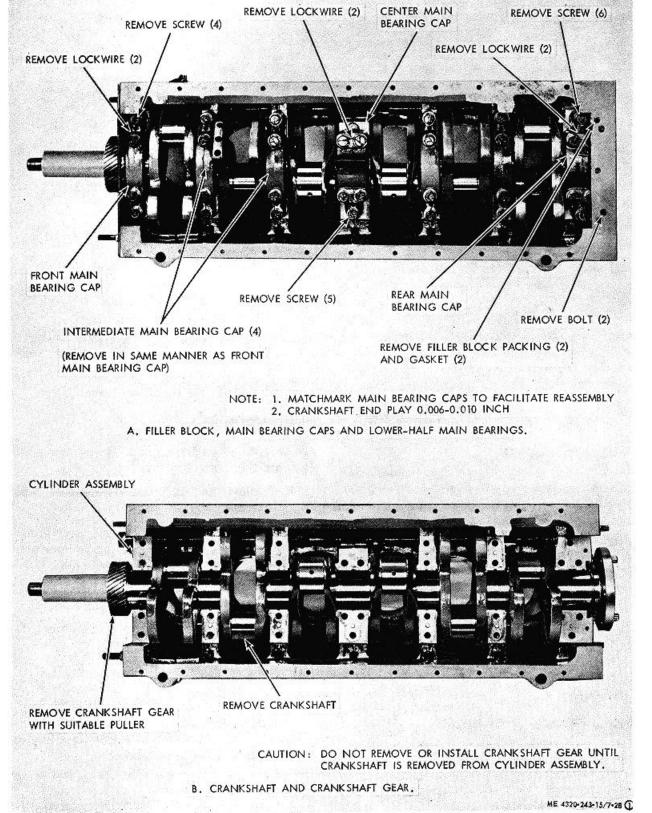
Filler block, main bearing caps, crankshaft gear, main bearings and camshaft bushings removal and installation.
